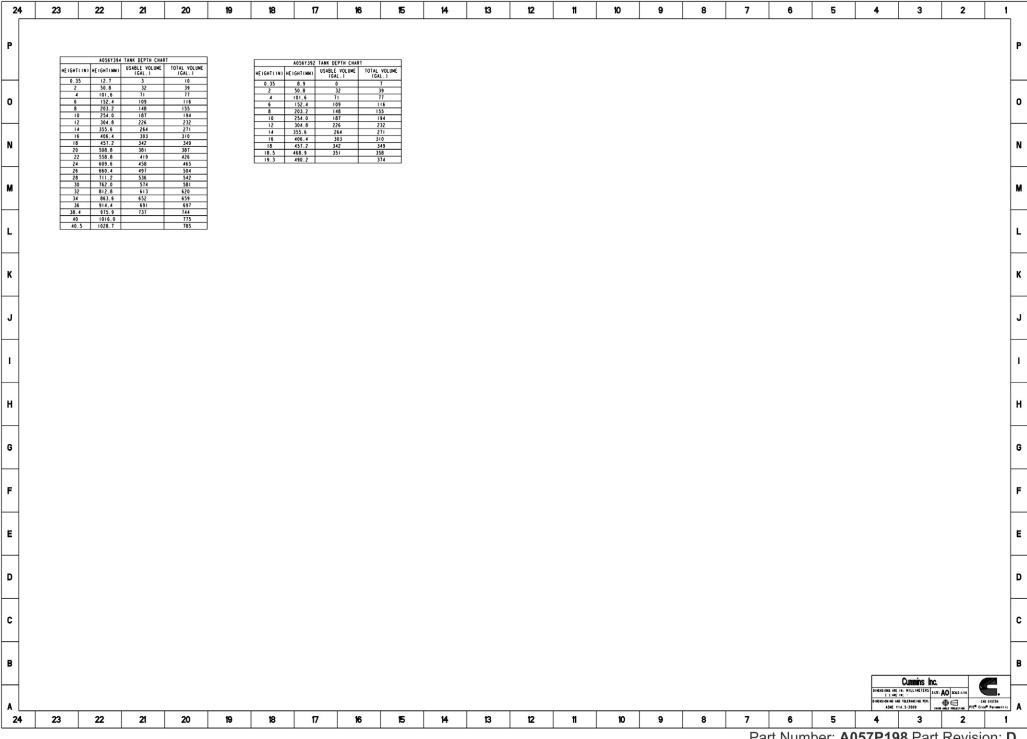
TANK OUTLINE DRAWING (SHEET 2 OF 4)
